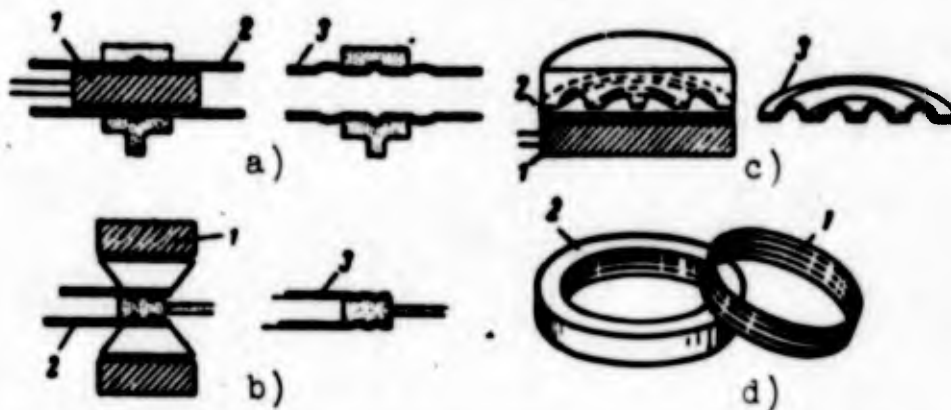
Electromagnetic forming. a and b) molded corrugations for pipes; c) forming of corrugated plate; d) corrugated ring; 1) formed part; 2) die.
